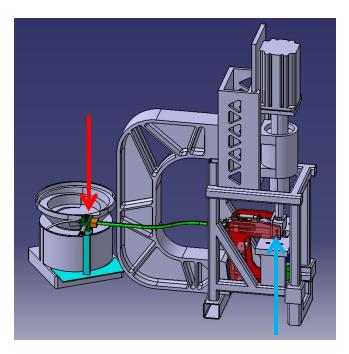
Overall View of the Welder, Bit Moves from the Red to the Blue Arrow
